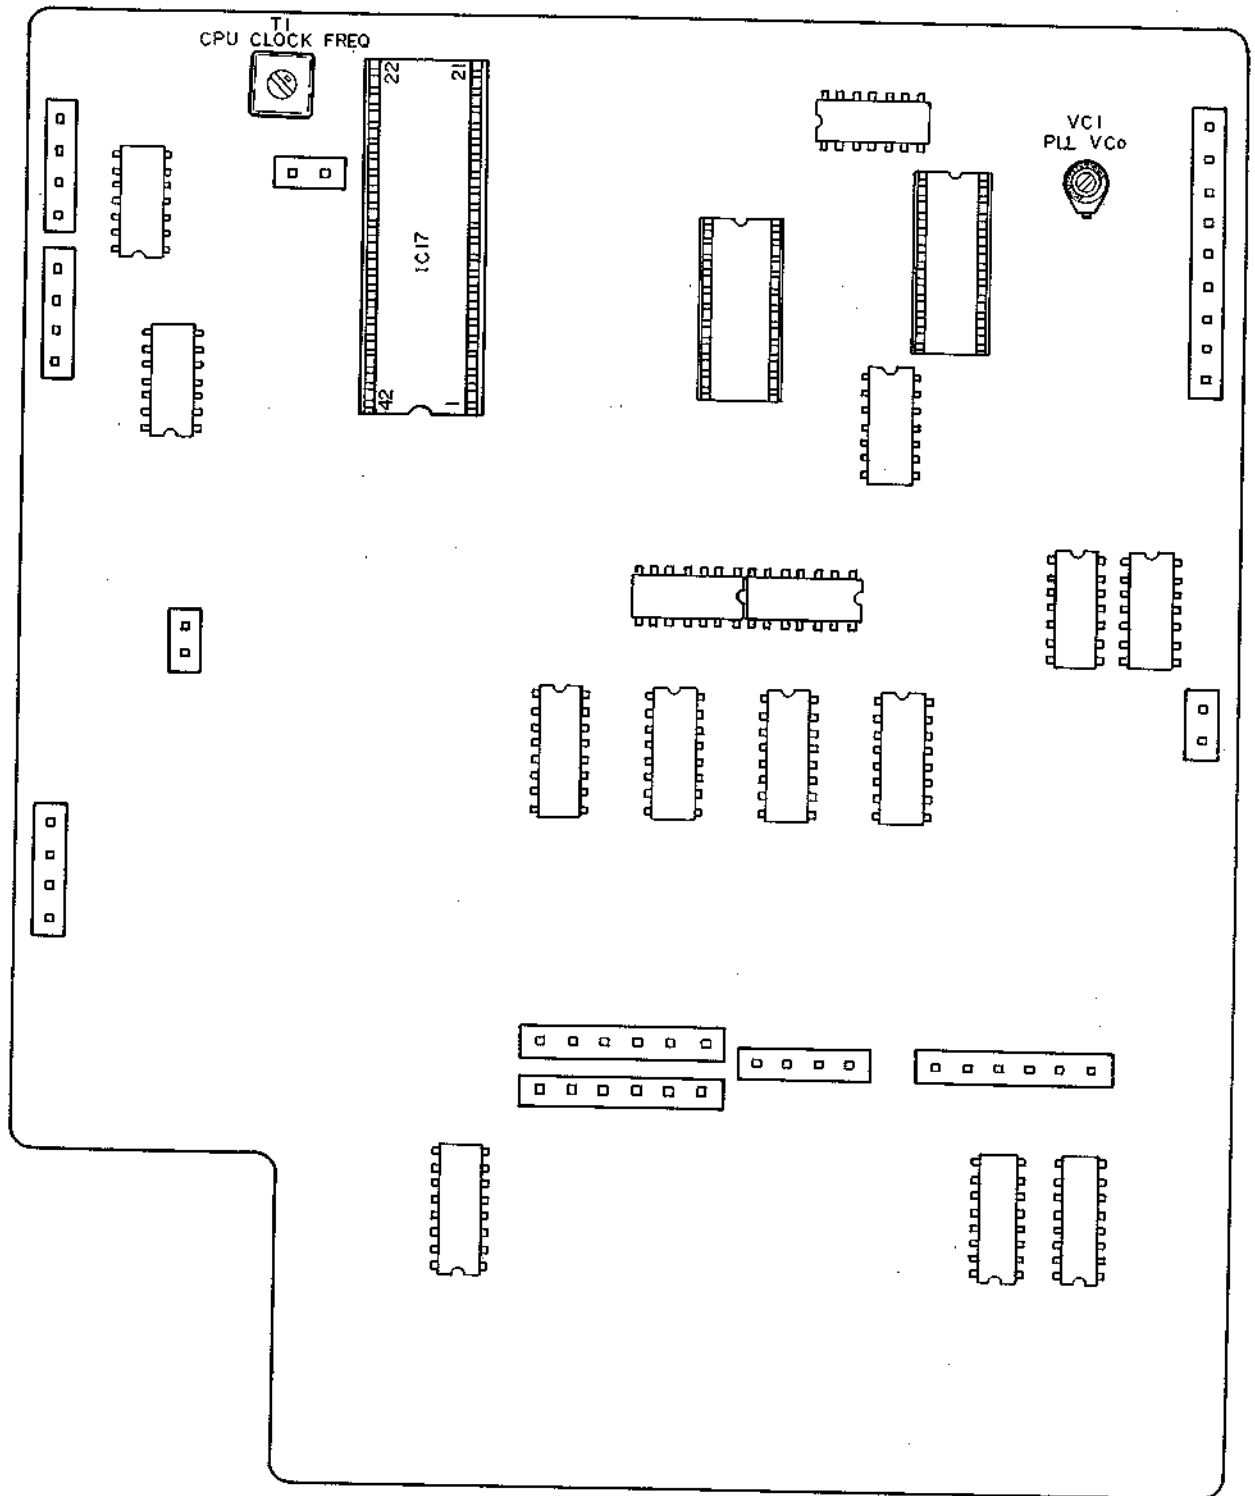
Synthesizer P.C Board (ATS-8002)
